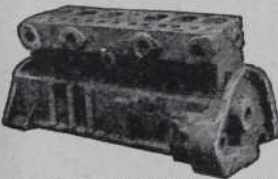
A 6-cylinder en bloc automobile engine casting is practically impossible except by machine-casting.
